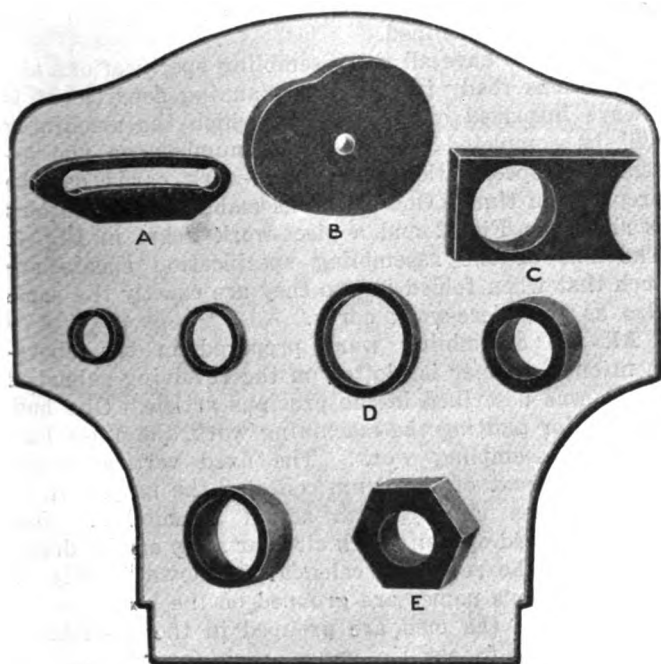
EXAMPLES OF WORK CUT BY GODFREY MACHINE
